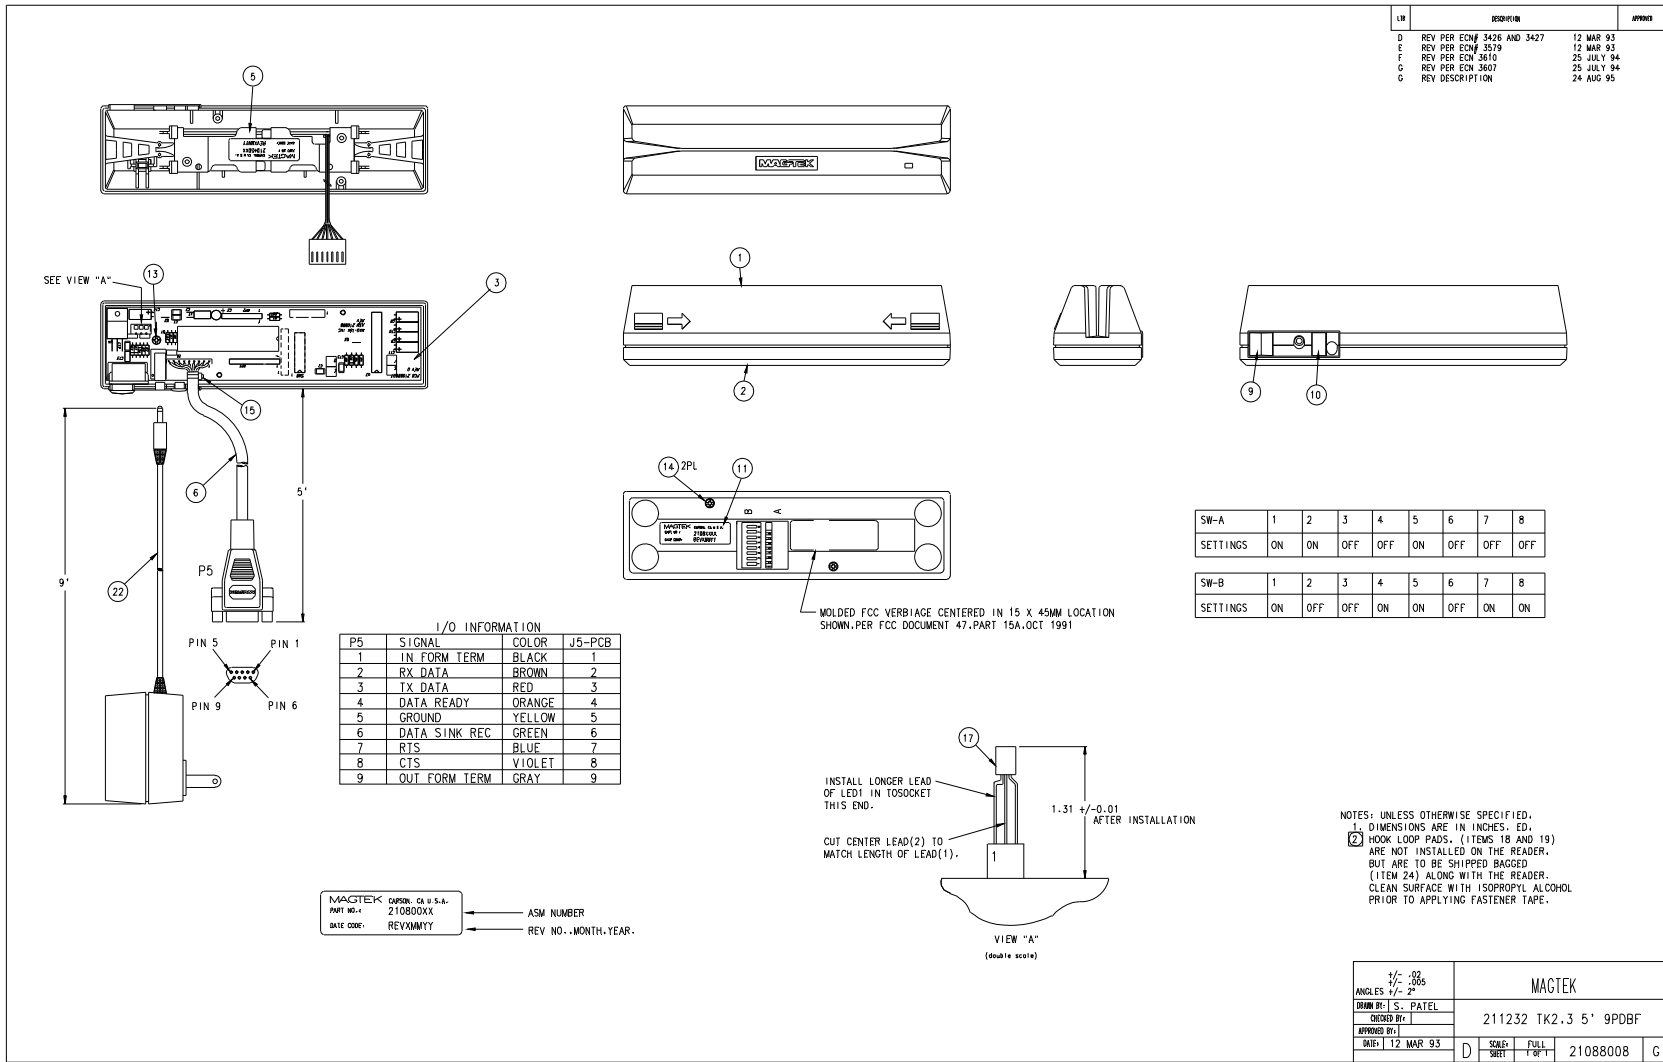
MT-211232 Top Assembly Drawing - Typical
